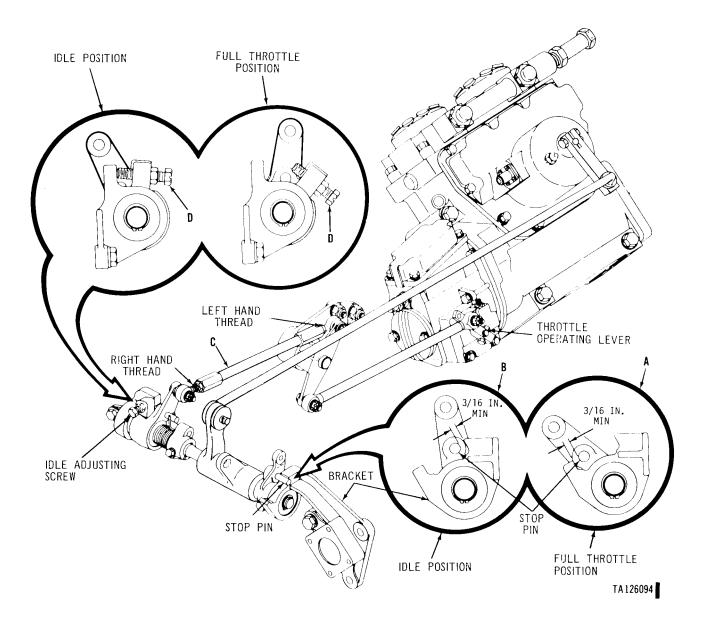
Throttle linkage adjustment, model AVDS-1790-2C and AVDS-1790-2D engines.
